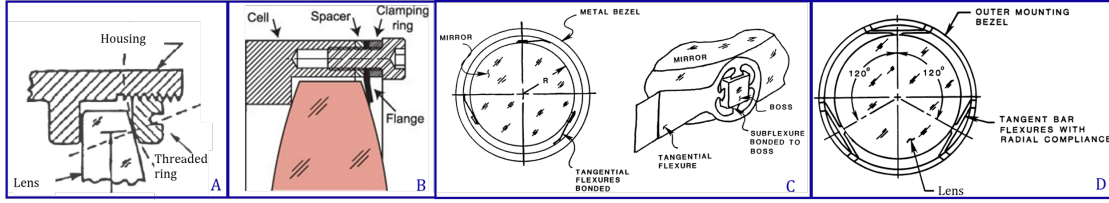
A: Barrel design with a threaded ring [38]. B: Barrel design with a flange [39]. C: Flexure design with subflexures. D: Radial compliant flexures [40]
